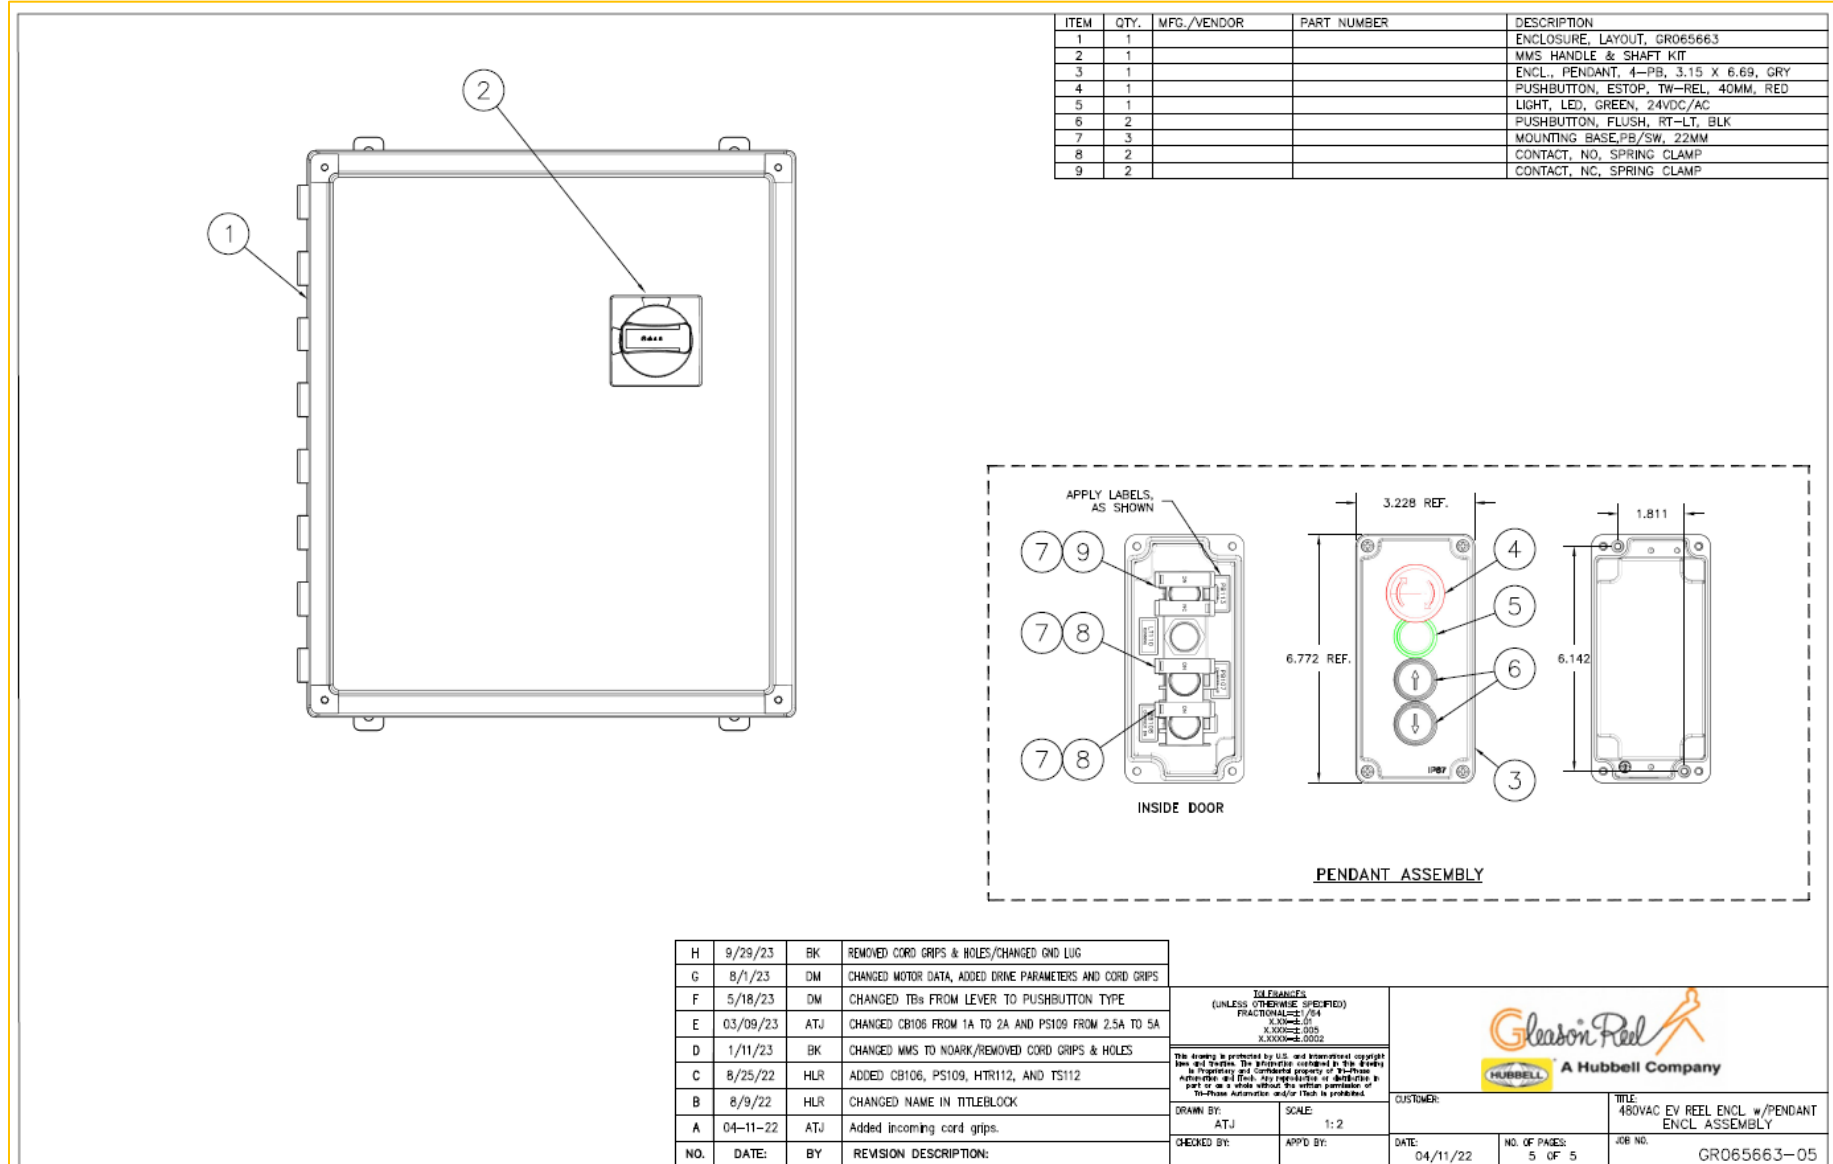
Control Panel Cord Grip Specifications & Pendant Dimensions
